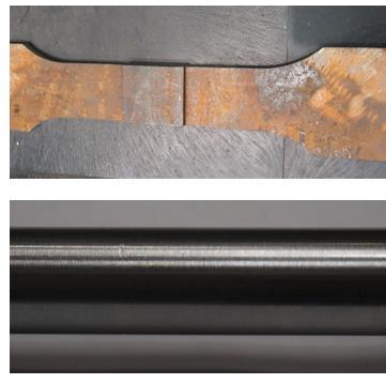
Backing-strip weld (top) and butt weld (bottom) specimens.
